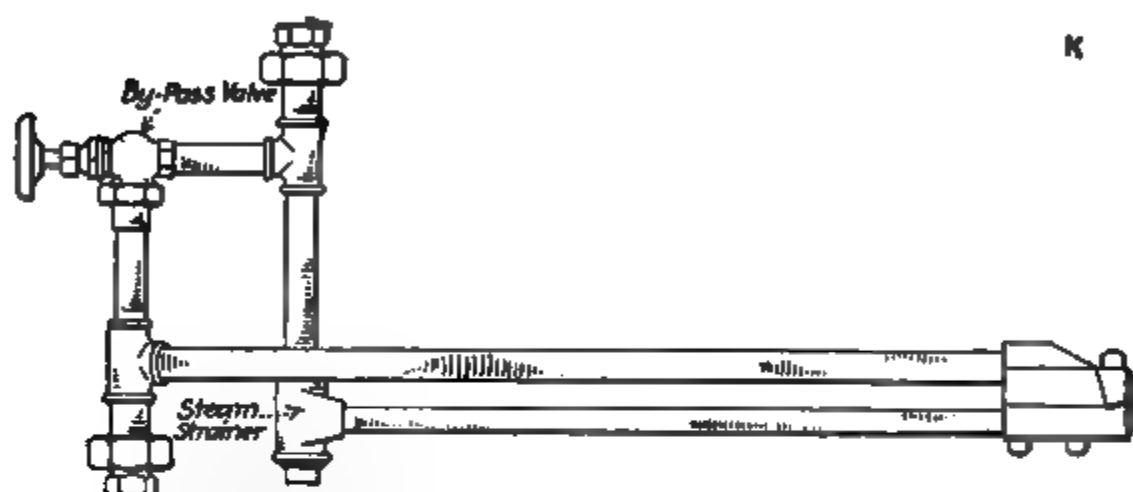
Flat flame, inside and outside mixer type, Hammel Oil Burning Equipment Company, "Front Shot."
